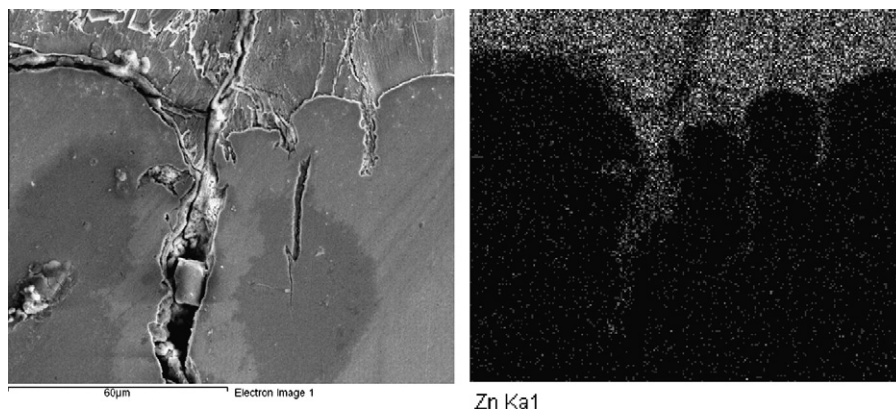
SEM image showing intergranular branched secondary cracks just behind the fracture surface. Energy dispersive spectroscopy in the SEM reveals zinc to have penetrated down these cracks, demonstrating that they were formed by LMAC.
